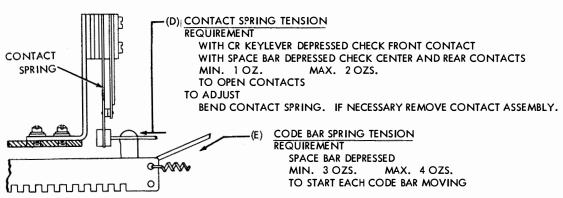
KEYBOARD, EXTERNAL TAPE BACKSPACE AND OFF-LINE CONTACT MECHANISM
